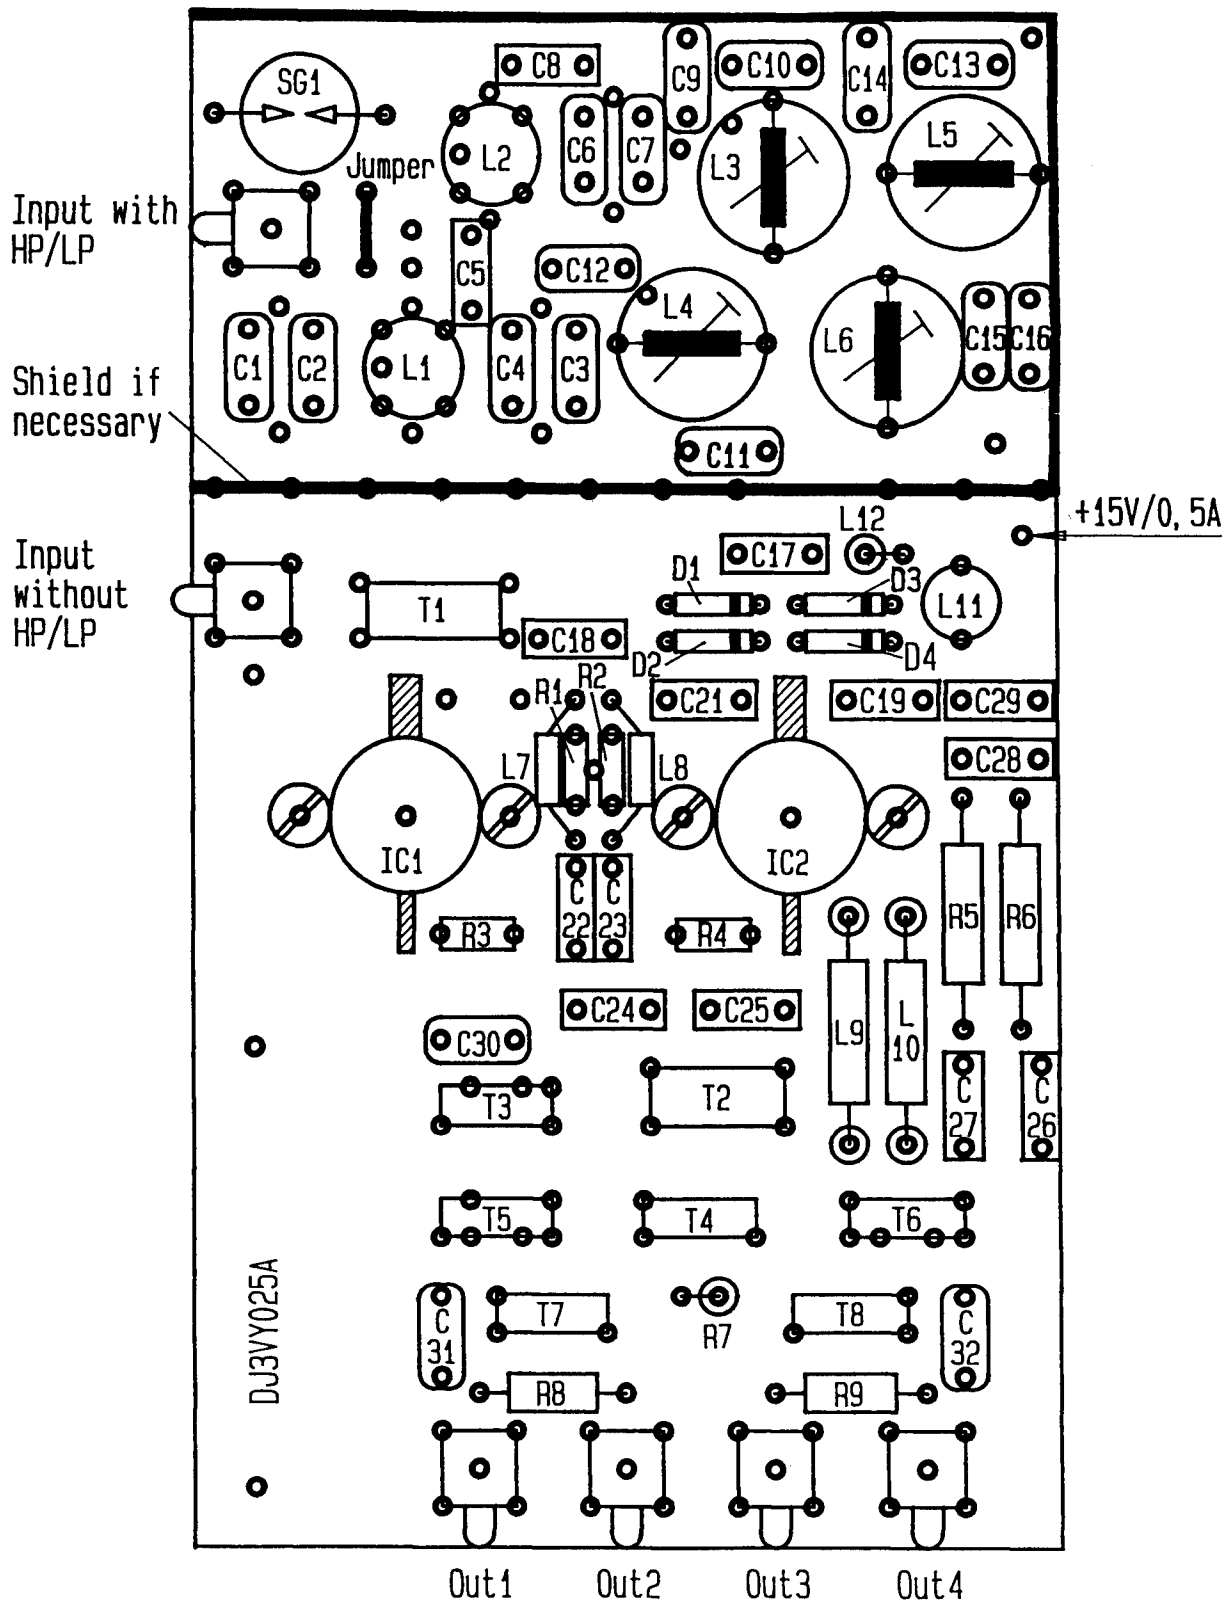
All components are placed on a PC board which measures 60 × 101 mm.
